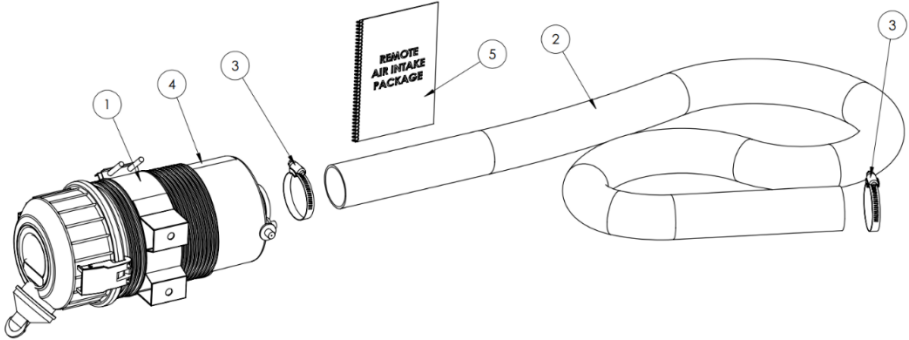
A2201## Remote Air Intake Package (A220212 shown)
